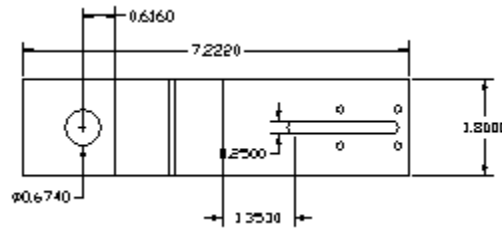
CAD drawing of the top view of the base of the frame (units in inches)
